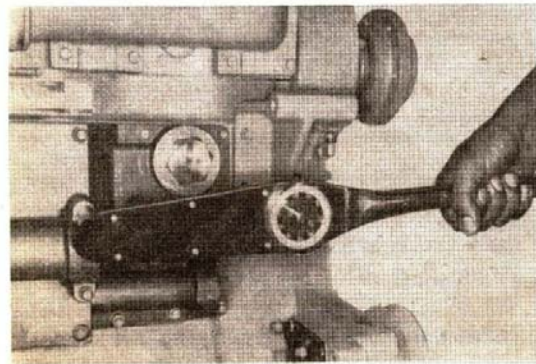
Tighten the lubricating oil cooler to the cylinder block
